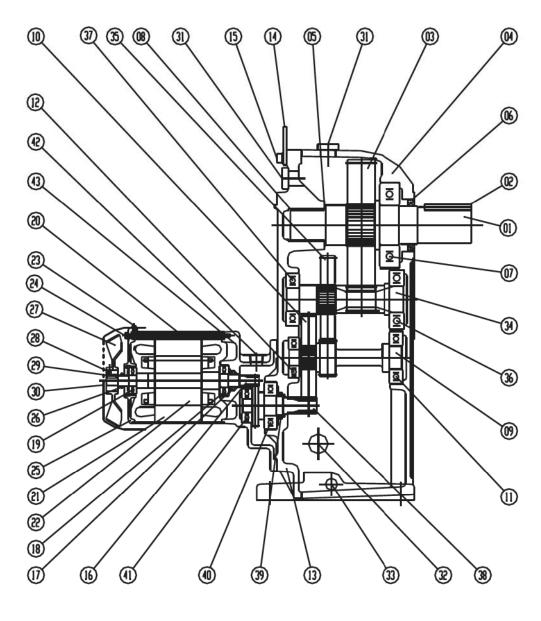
4stage of gear Unit Oil Lubrication type(high ratio type) *Grease lubrication is adopted for the intermediate gear case
